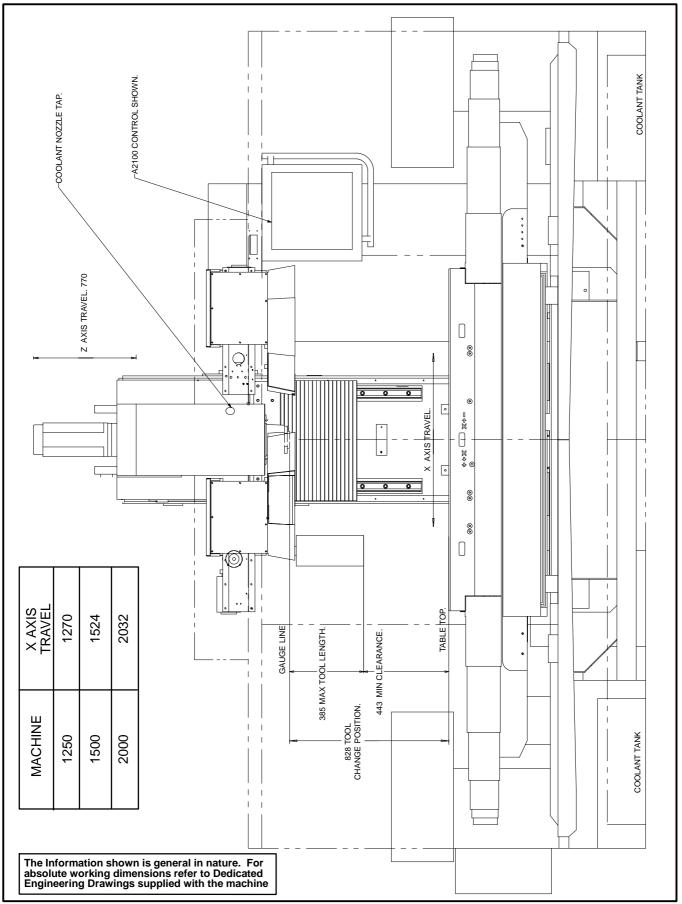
Range Drawings for Arrow (ERD) 1250, 1500, 2000 - Front View
